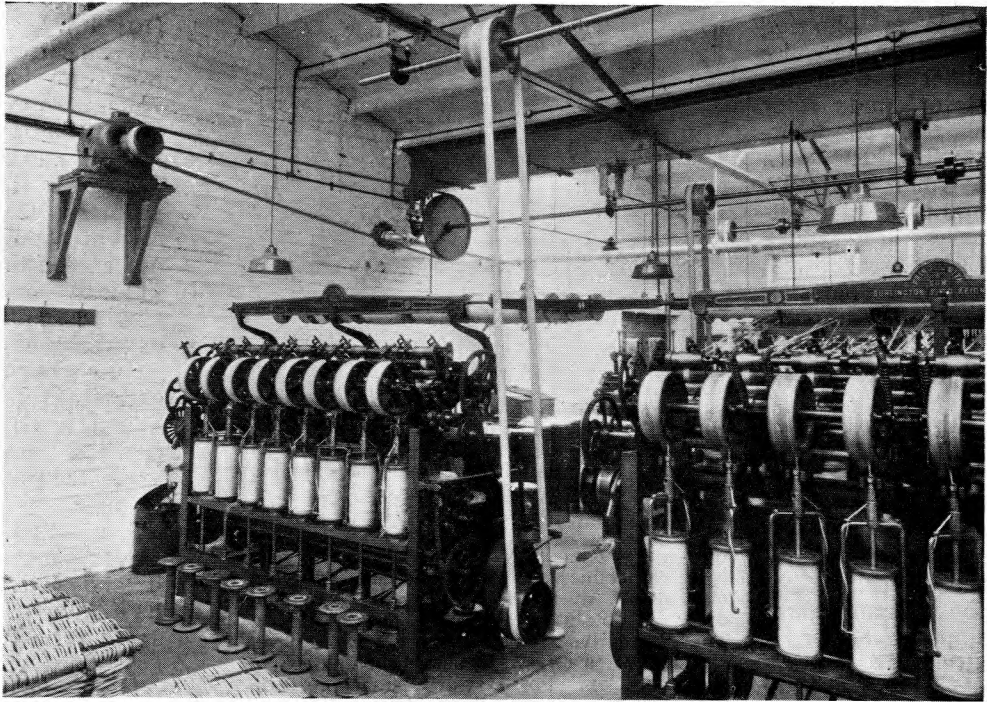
INDUCTION MOTOR DRIVE IN A TEXTILE MILL.
